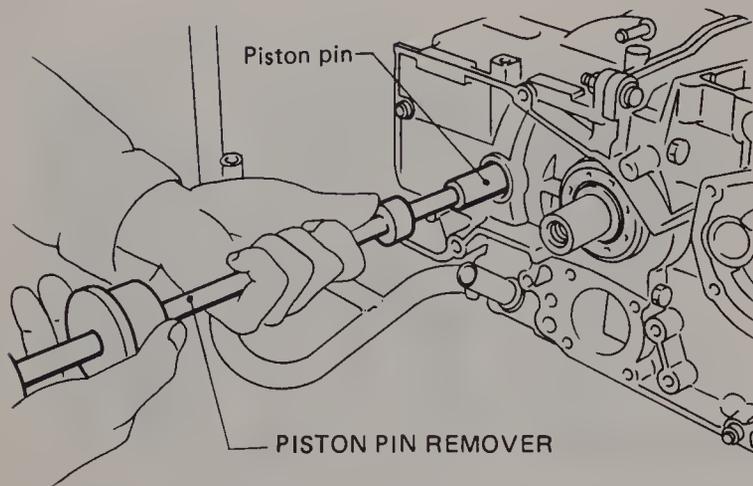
A special tool is required to remove the piston pins (Sec 5)
